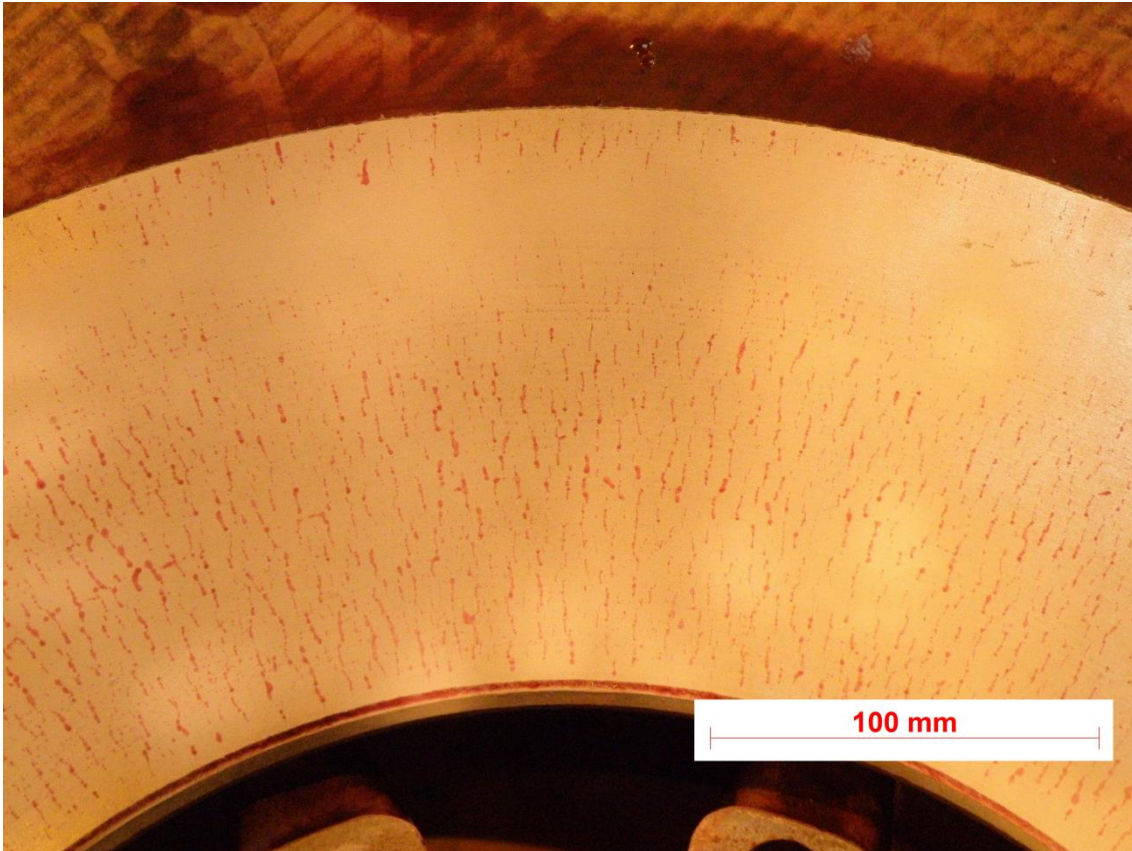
Surface crack testing on the ground 640 mm outer diameter disc (dye penetrant inspection)
